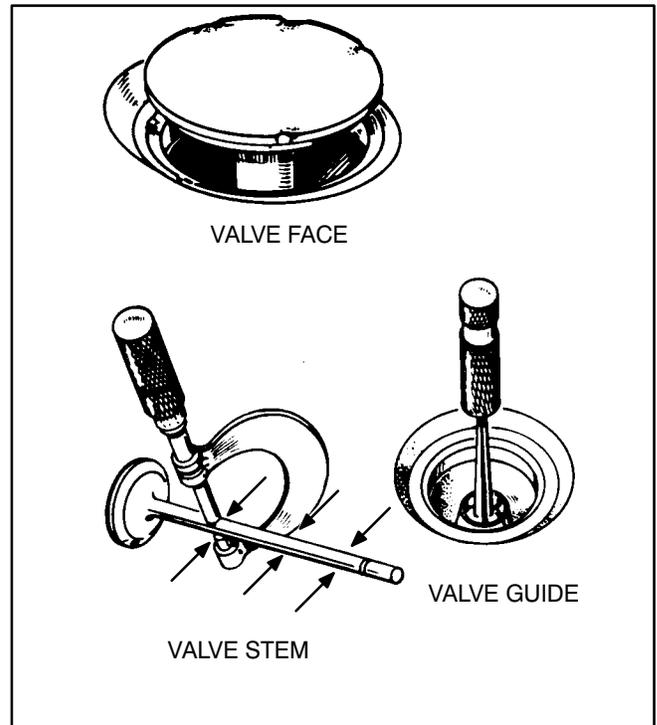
VALVE FACE, STEM, AND GUIDE
